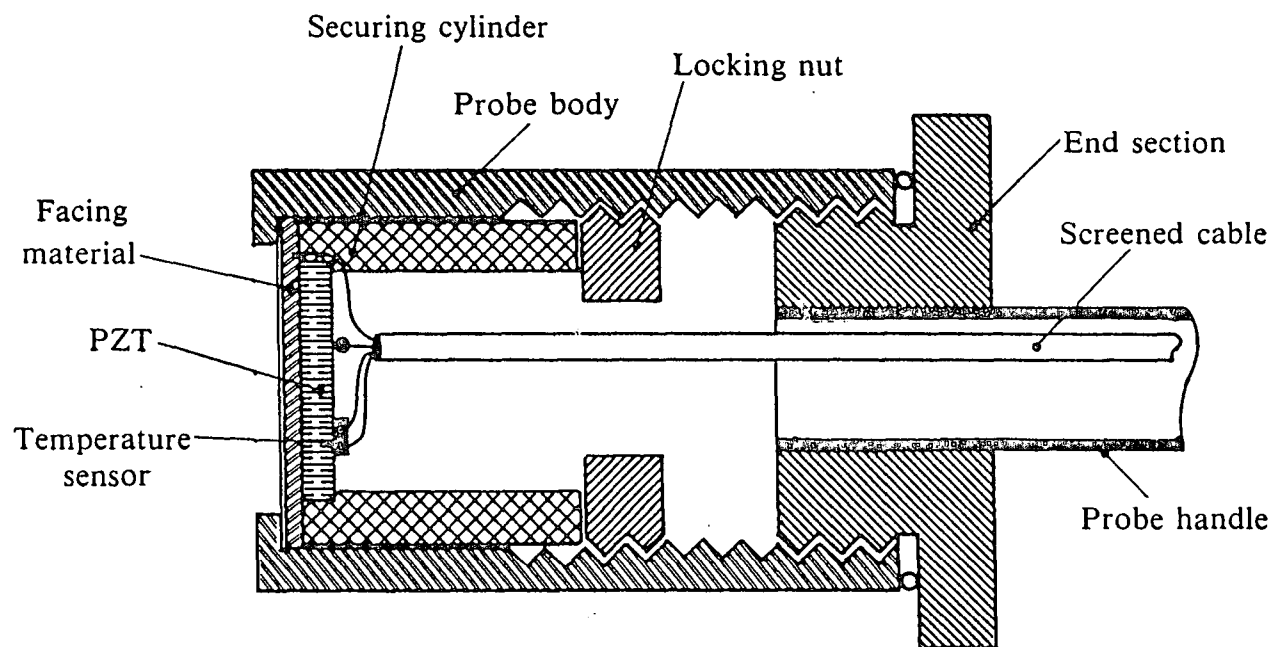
THE FINAL PROBE ASSEMBLY
